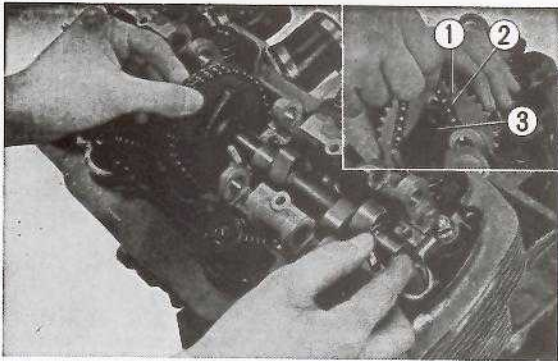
① Cam sprocket ② Cam chain ③ Cam shaft
